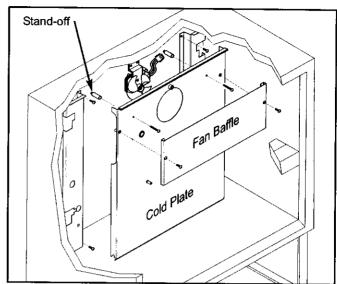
700BR-3 Fan Baffle & Cold Plate
